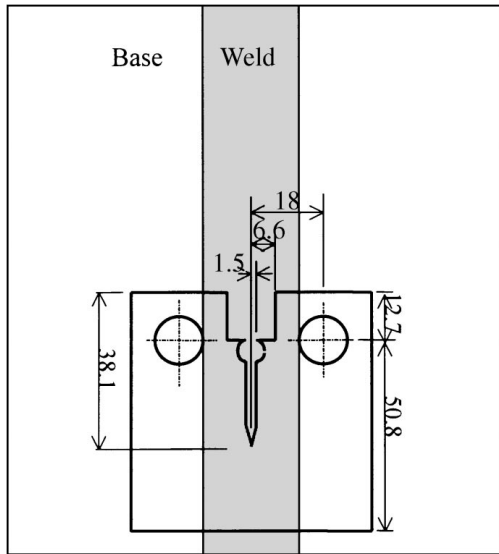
The geometries of the Type 347 SS weldment and the *J-R* test specimen (unit: mm).
